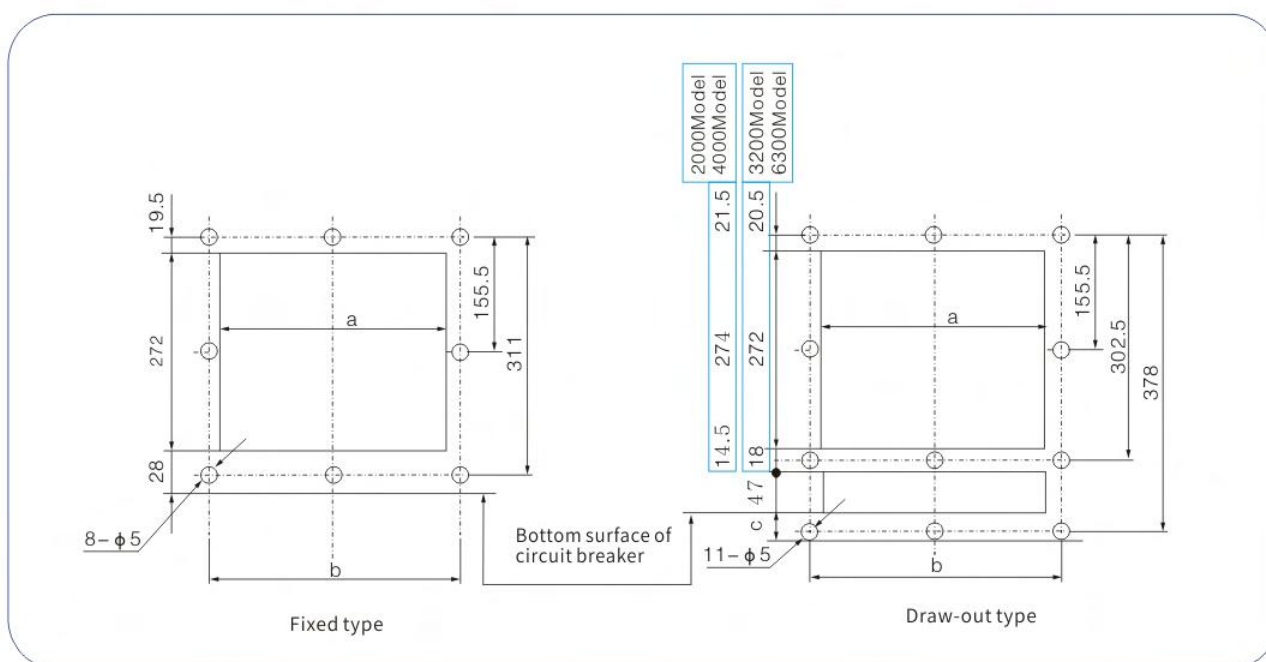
Outline and installation dimension of the draw-out type circuit breaker (JUW1 -6300/3 In=6300A)
